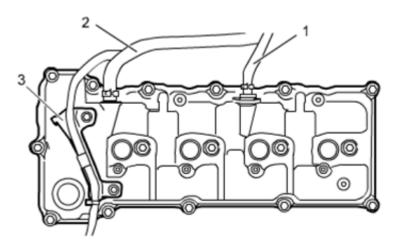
Identifying PCV Valve Hose And Breather Hose Courtesy of SUZUKI OF AMERICA CORP.
